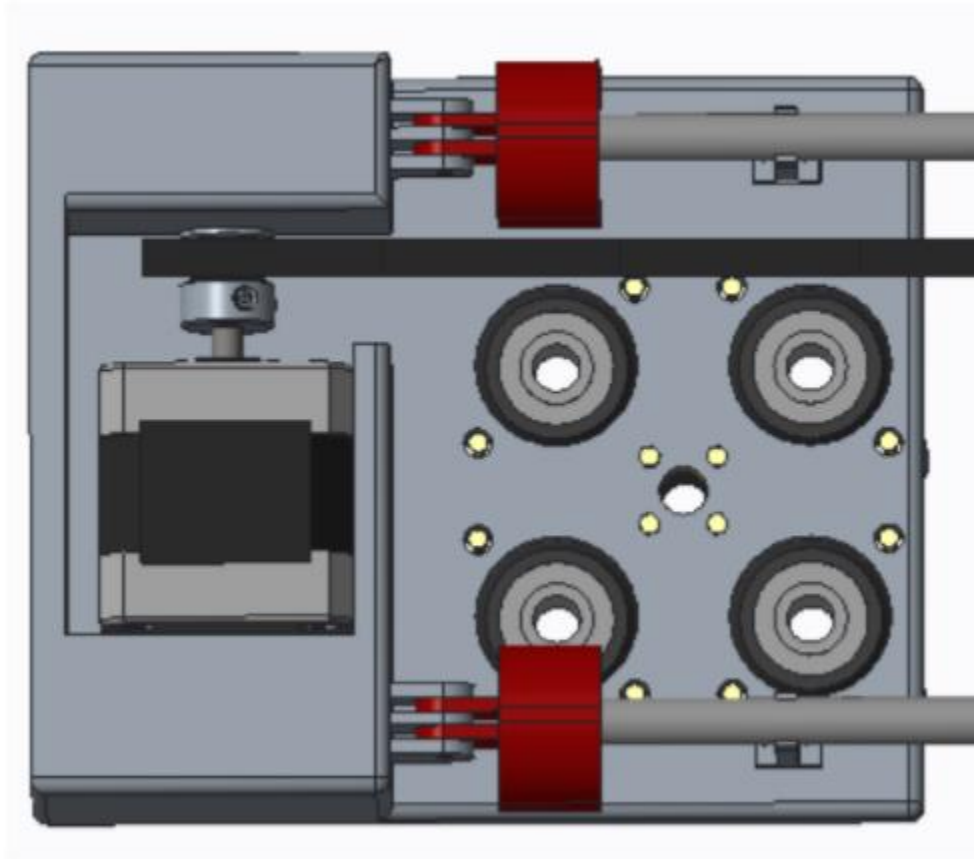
Redesigned Base Plate with Built-in Motor Housing, Folding Mechanism, and Holes for Bearings
